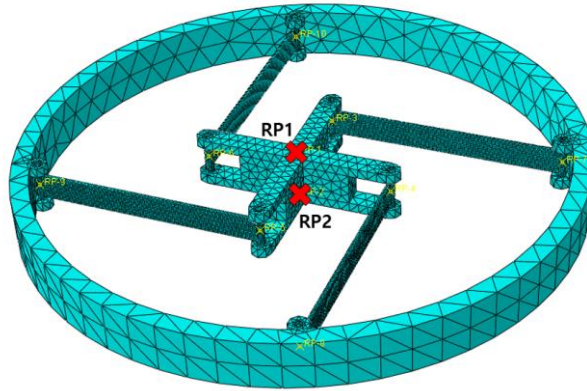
Reference points for the inner rotational part and the outer ring.
